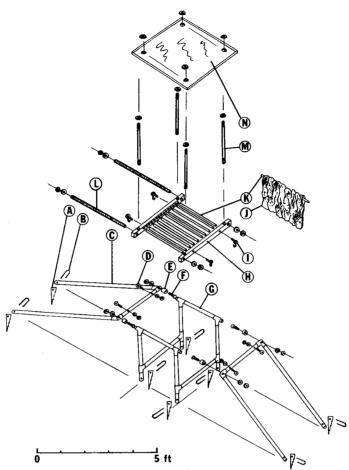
Diagram of polyvinylchloride (PVC) tubular framework, exit grid and rain shield for a self-marking device.⁴ (A) Anchoring stake (9 in), (B) stainless steel wire, (C) lateral extension section (0.5 in PVC pipes and joints), (D) eyebolt, (E) PVC pipe cap (0.5 in diam), (F) machine bolt (0.38 in diam \times 4 in long with 16 threads/in and accompanying nuts and washers), (G) primary support section (0.5 in PVC pipes and joints), (H) wood piece (30 in long, 2×2 in milled
